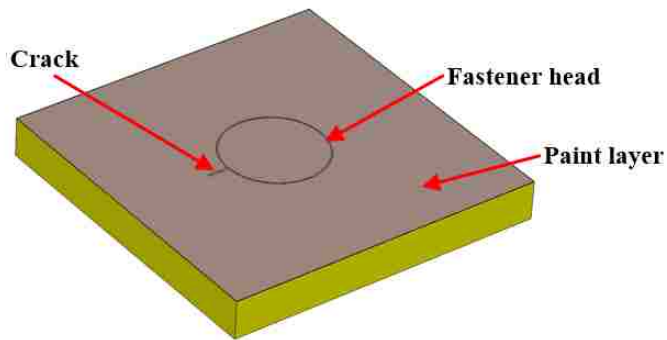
Illustration of paint layer covering the fastener head and crack.
